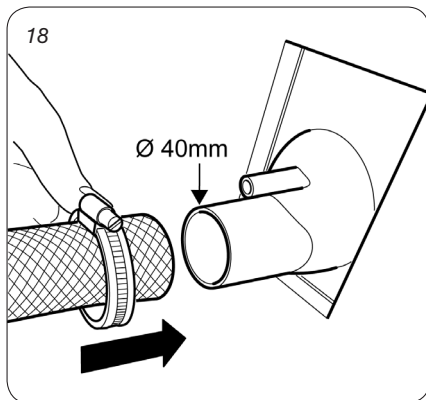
Onboard Tank Fill Socket Dimensional Drawings
